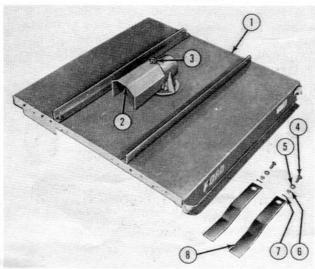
60-Inch Cutter Frame — Component 22-194 Shown
